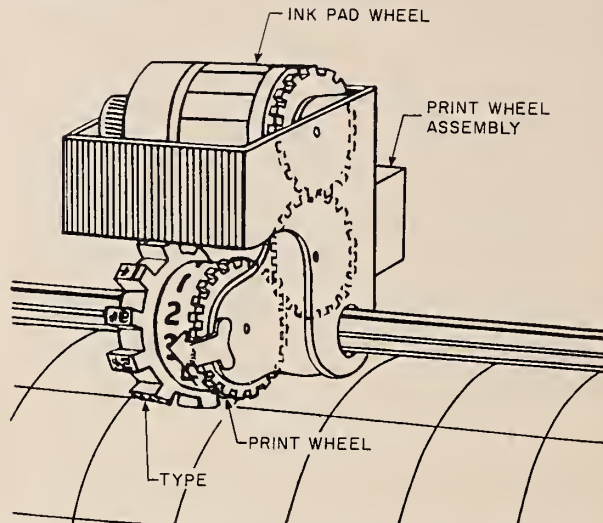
Print wheel with synchronized inking pads (Brown Instrument Co.).
